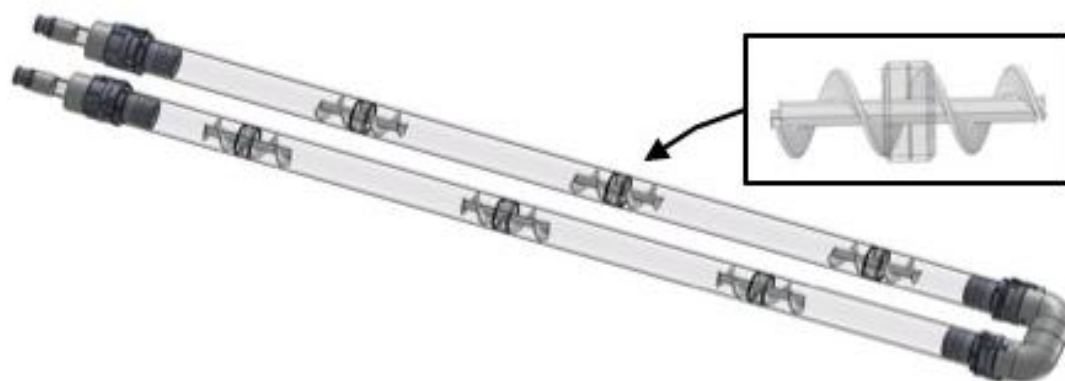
Illustration of OMEGA PBR tubes with swirl vanes. PBRs were made of flexible, clear LLDPE connected with cam-lock fittings to a U-shaped PVC manifold. The six swirl vanes (see insert enlargement) directed the flow into a helical path to improve mixing and light exposure of the microalgae.
